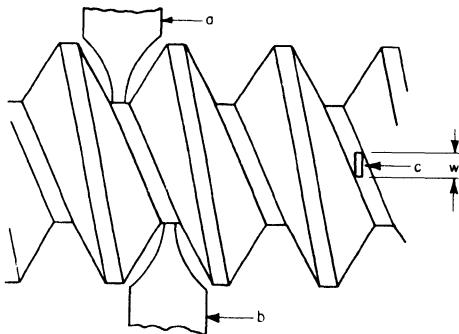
Schematic diagram showing how the anvils of caliper type gages should be proportioned to prevent contact with the sides of the thread.
